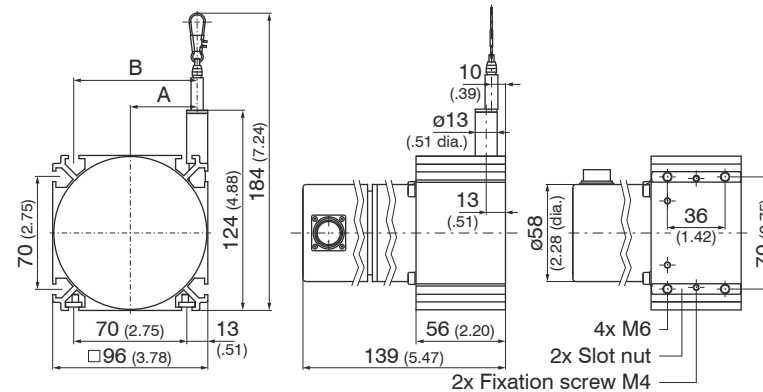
Dimensional drawing ... - FD96 - SSI, dimensions in mm (inches), not to scale
